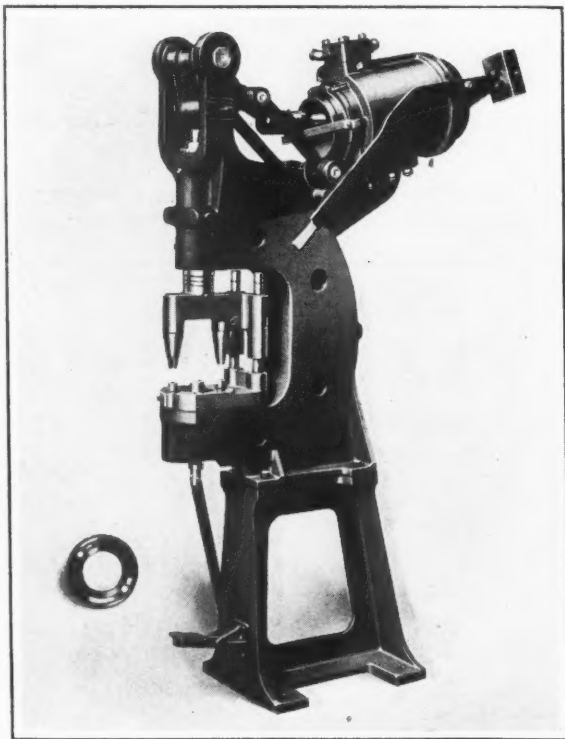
Riveter with Vertical Dies for the Same Class of Work as the Machine in Fig. 1
